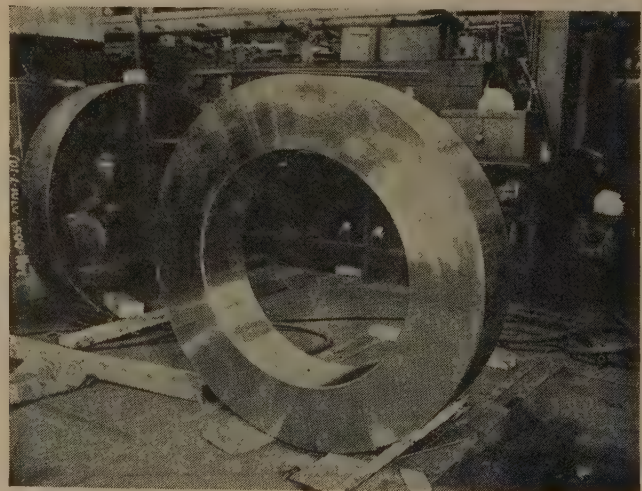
FLYWHEEL FOR 56-IN-DIAM DAMPER
